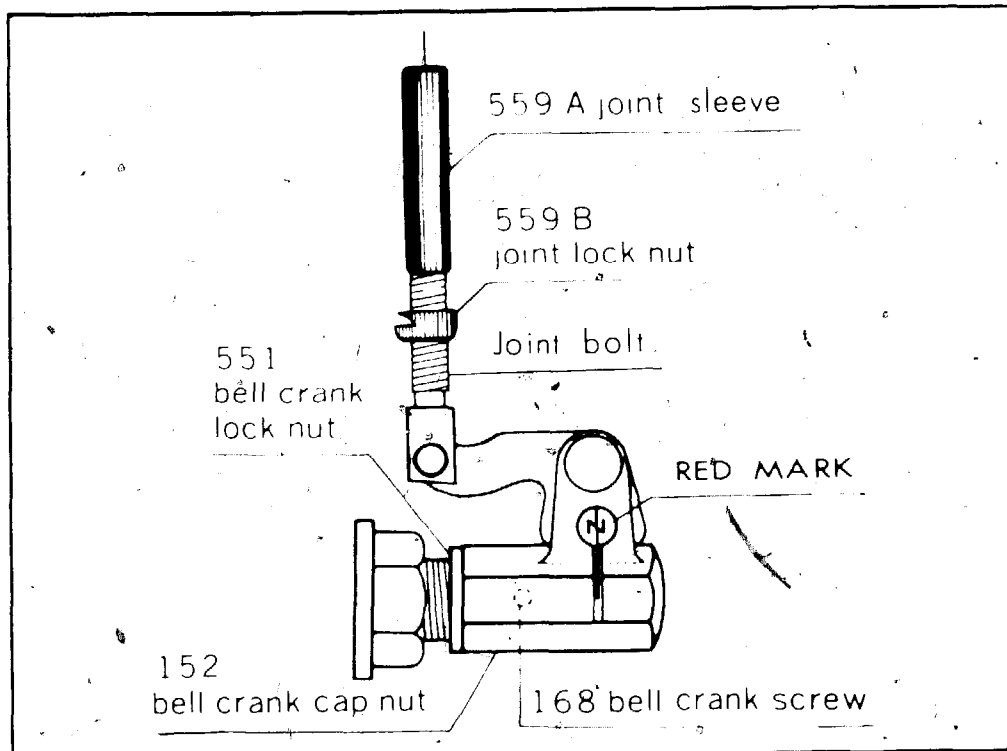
Adjustment indicator on Shimano three-speed hub.
